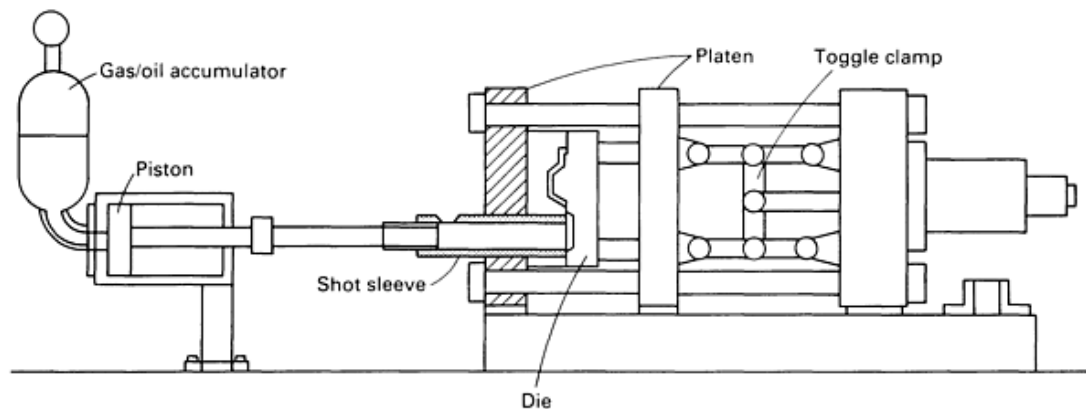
Schematic view of a cold chamber die casting machine [2]
